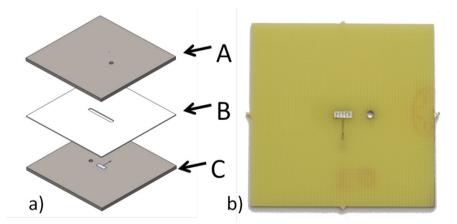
a) Exploded CAD-model of the micro-valve, b) photography of a function layer.
